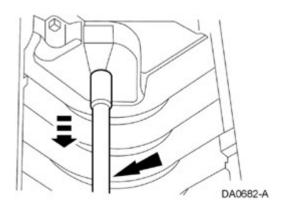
Locating Heater Outlet Tube Studs Courtesy of FORD MOTOR CO.
